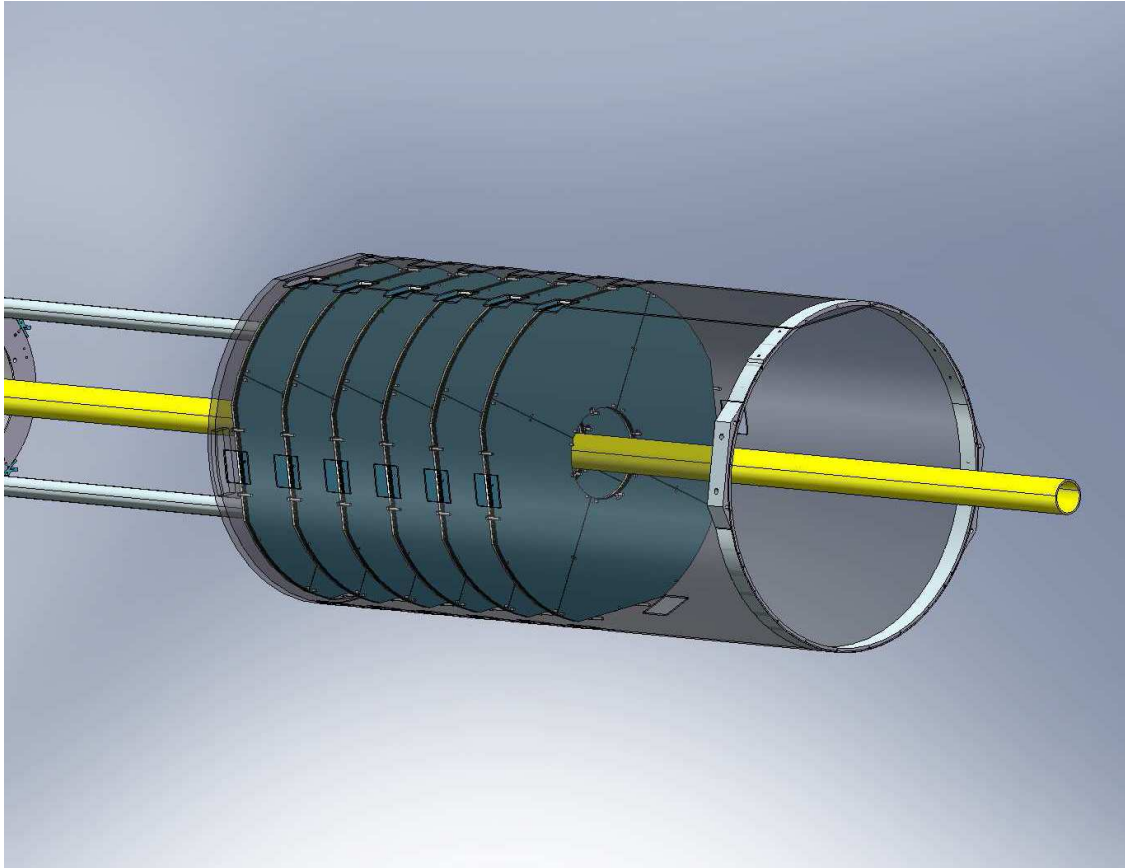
3D-view of the FGT as modeled by the mechanical engineering design tool called SolidWorks.
